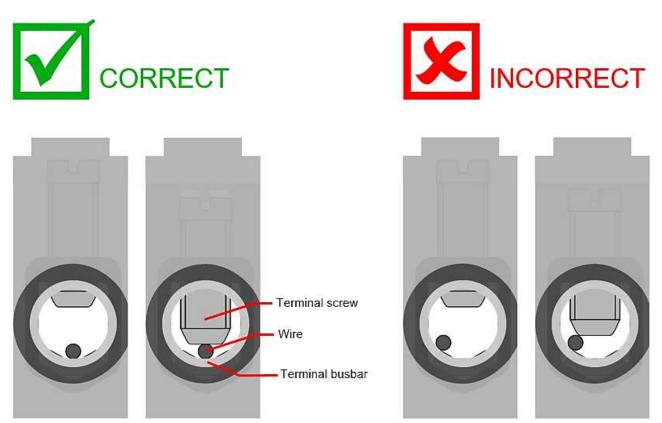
Properly inserting and fixing the cable with 2.5 mm² wire cross-section in the main terminal
